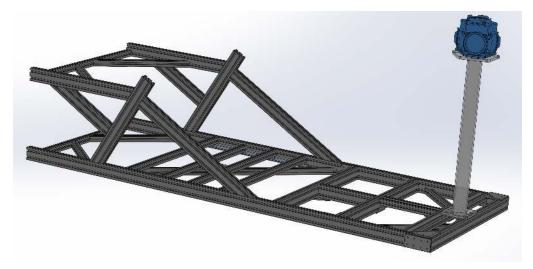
CAD model of the standing platform and Ladybug 5+ camera mount with standing plate and camera cover removed
